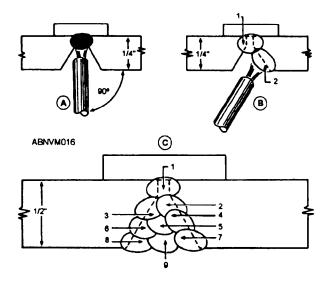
Bead sequence and electrode angle for welding a butt joint in the overhead position.
